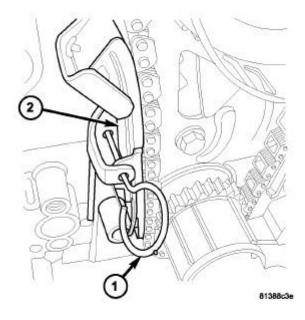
TENSIONER PIN Courtesy of CHRYSLER LLC
